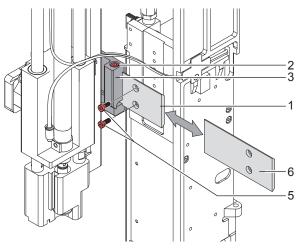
Changing adapter profile for tamp pad 116x102 and 116x152
